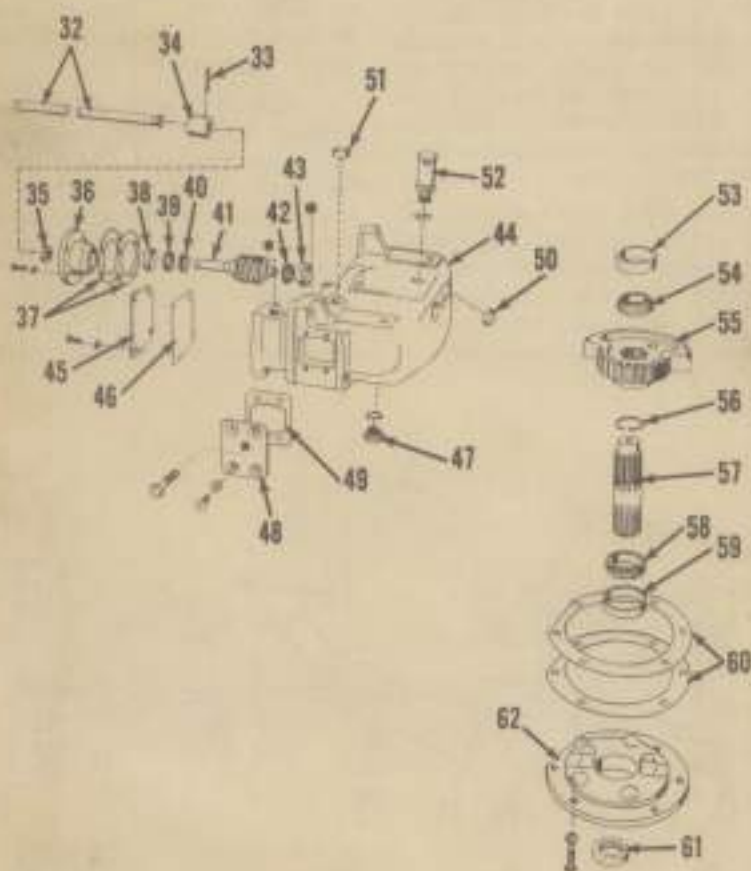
Exploded view of manual steering front support and associated parts. Shims (37) are available in 0.005 vellum or steel; shims (60) are available in either vellum or steel, vellum being 0.005 and steel 0.010 thick.
